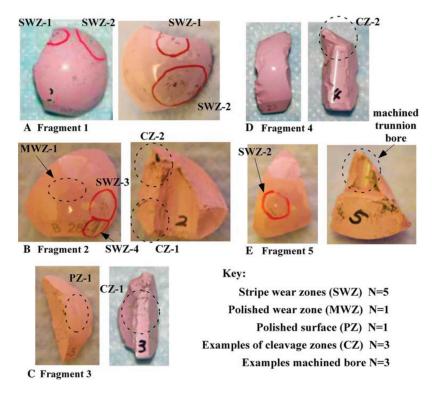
A-E: Photographs show five of the largest of seven fragments (A-E) from a fractured 28 mm 'Delta' ball. The circles indicate site of analysis for polished main wear zone (MWZ), stripe wear zones (SWZ), metal contamination, machined taper bore and fracture cleavage regions (CZ).
